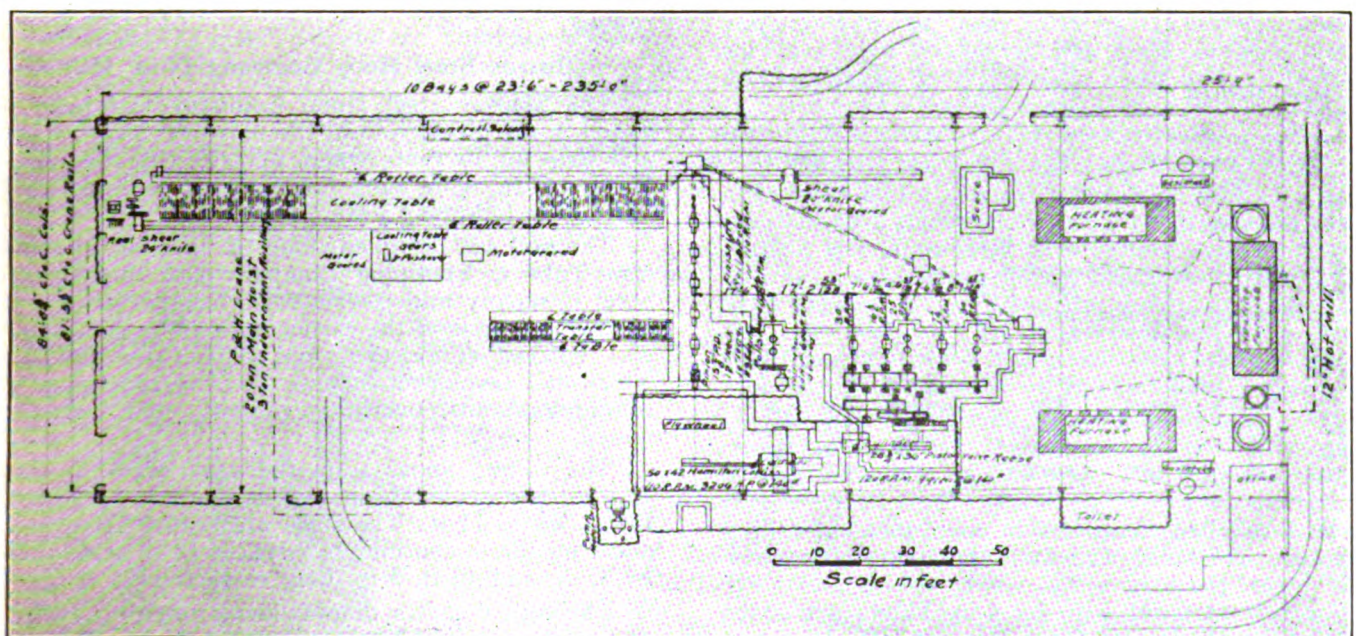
16-in. Strip mill. Superior Steel Corporation, 1905.
